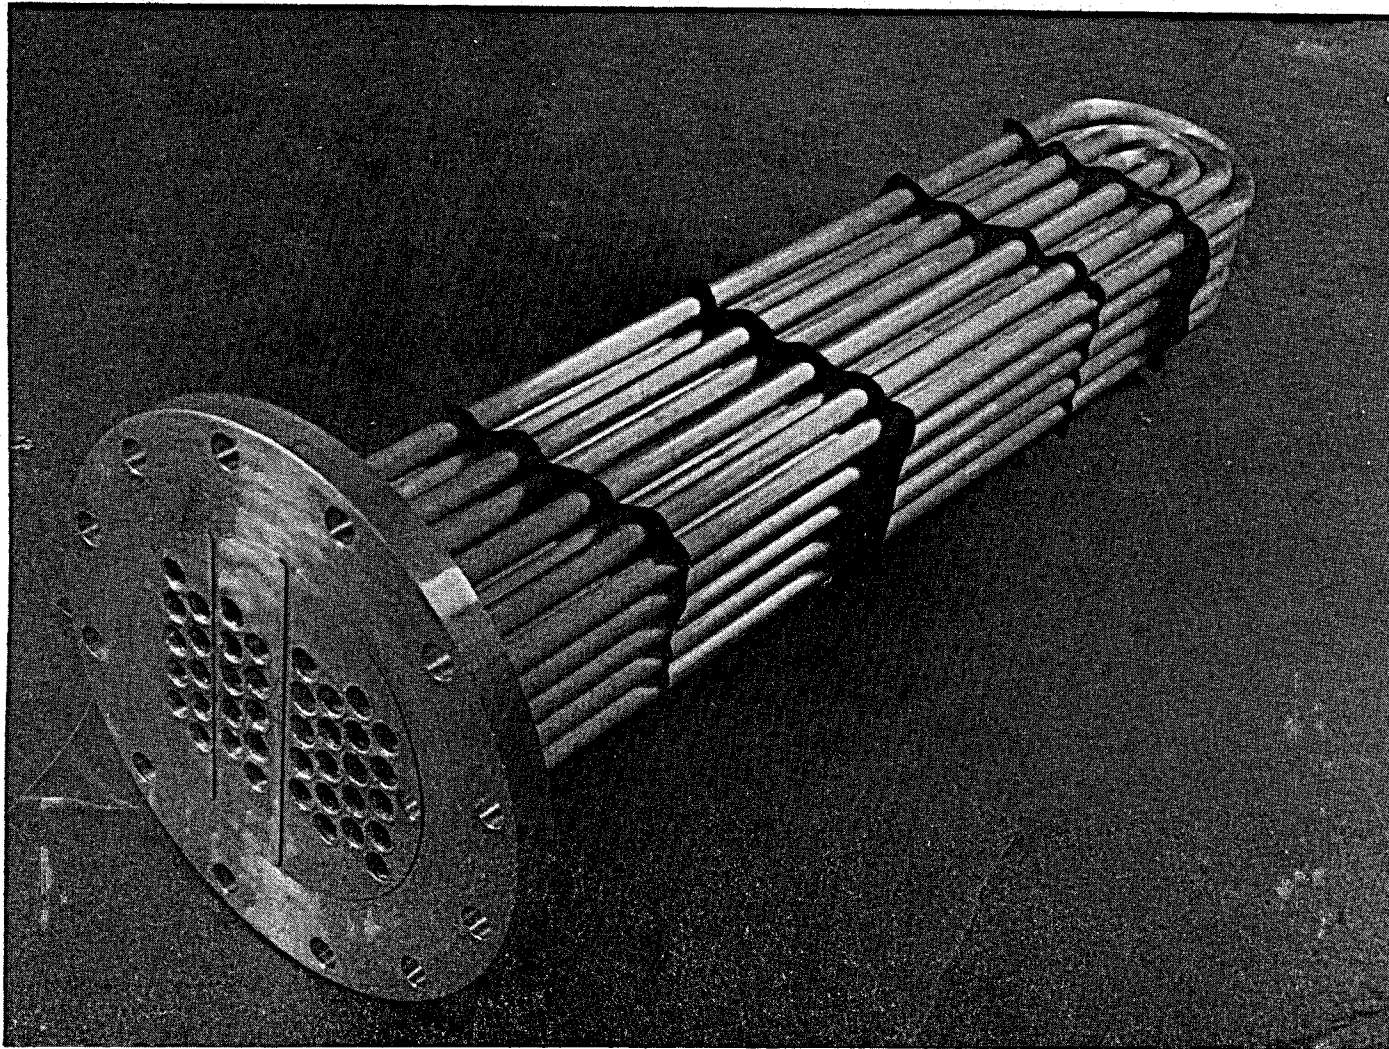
The ORNL 40-tube condenser - tube bundle photo.
